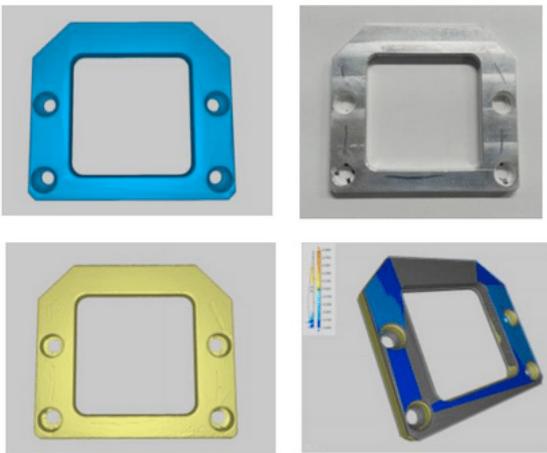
From left to right: CAD drawing, manufactured part, scanning and best-fit
